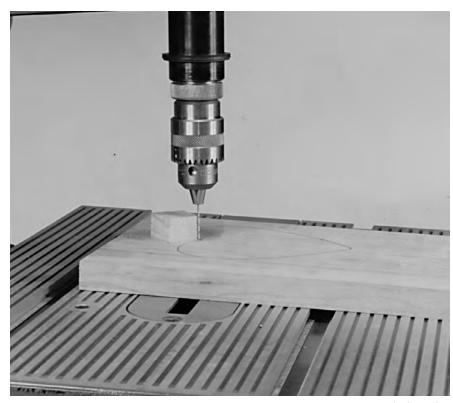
Use your test piece as a guide for drilling a hole for the blade at the proper angle.
